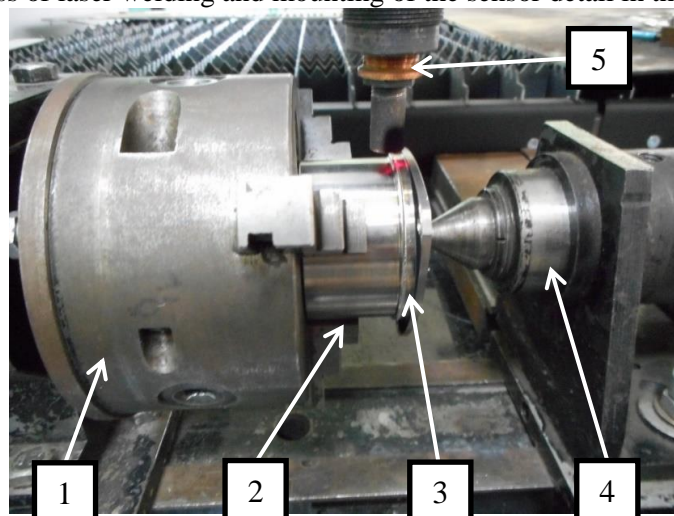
The process of laser welding according to the “cover with flanging” scheme, and fixing the welded part in the rotator, where 1 – clamping chuck, 2 – sensor part housing, 3 – welded joint, 4 – tailstock, 5 – laser welding head
